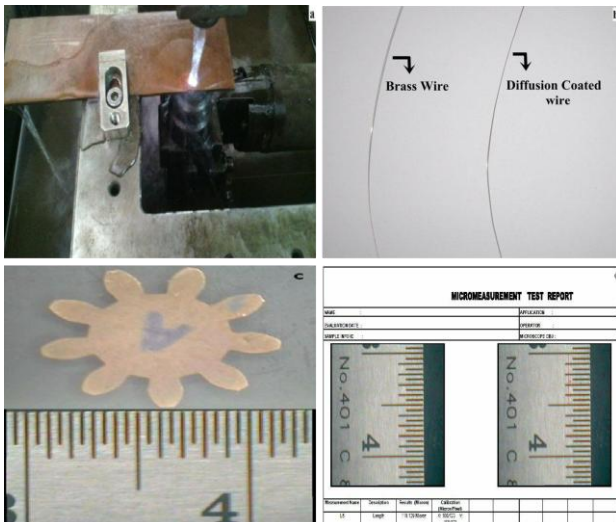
(a). Machining of copper gear by wire EDM, (b) different types of wires, (c) Top surface of the gear at 10X Zoom (d) Scaling at 10X zoom
